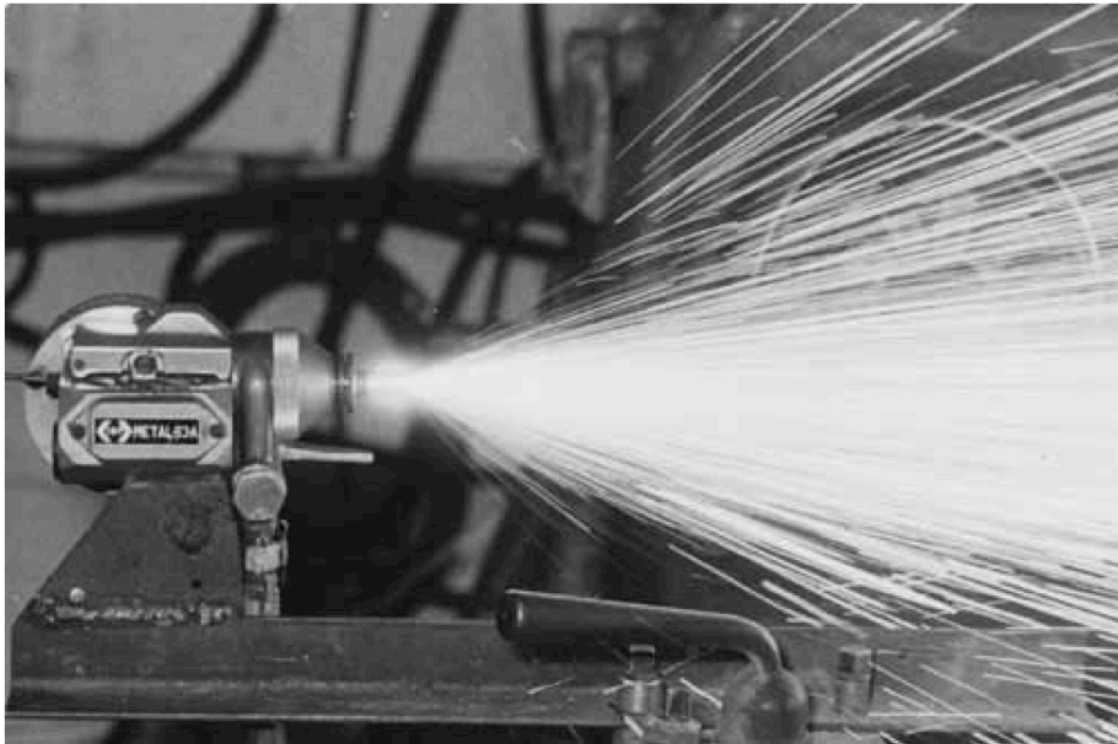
Spaying of the zinc layer on the railroad tank [13]
